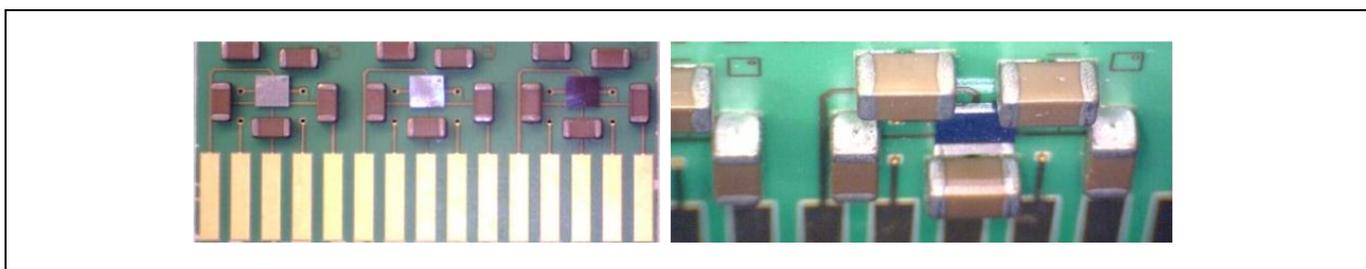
Typical PCB layouts using passive components to protect xWLy packages
